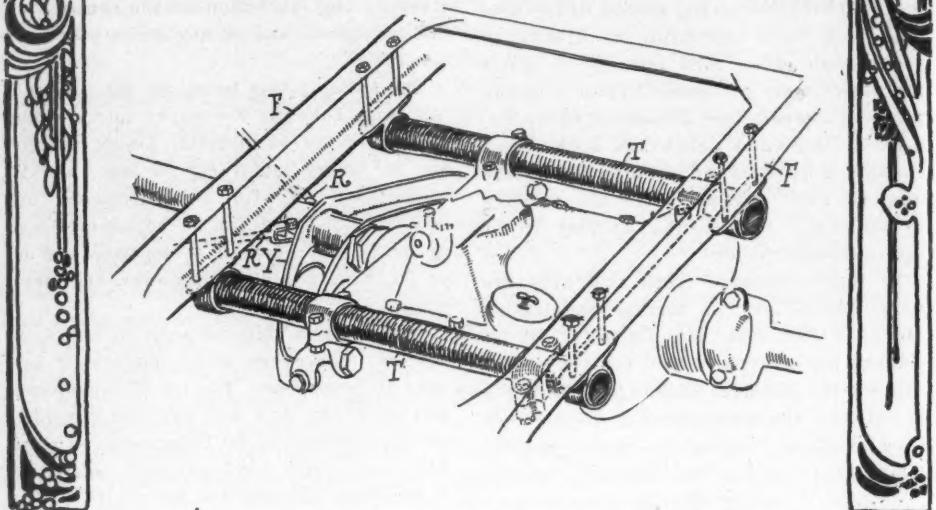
THE GEARSET IS CARRIED ON TUBULAR MEMBERS
